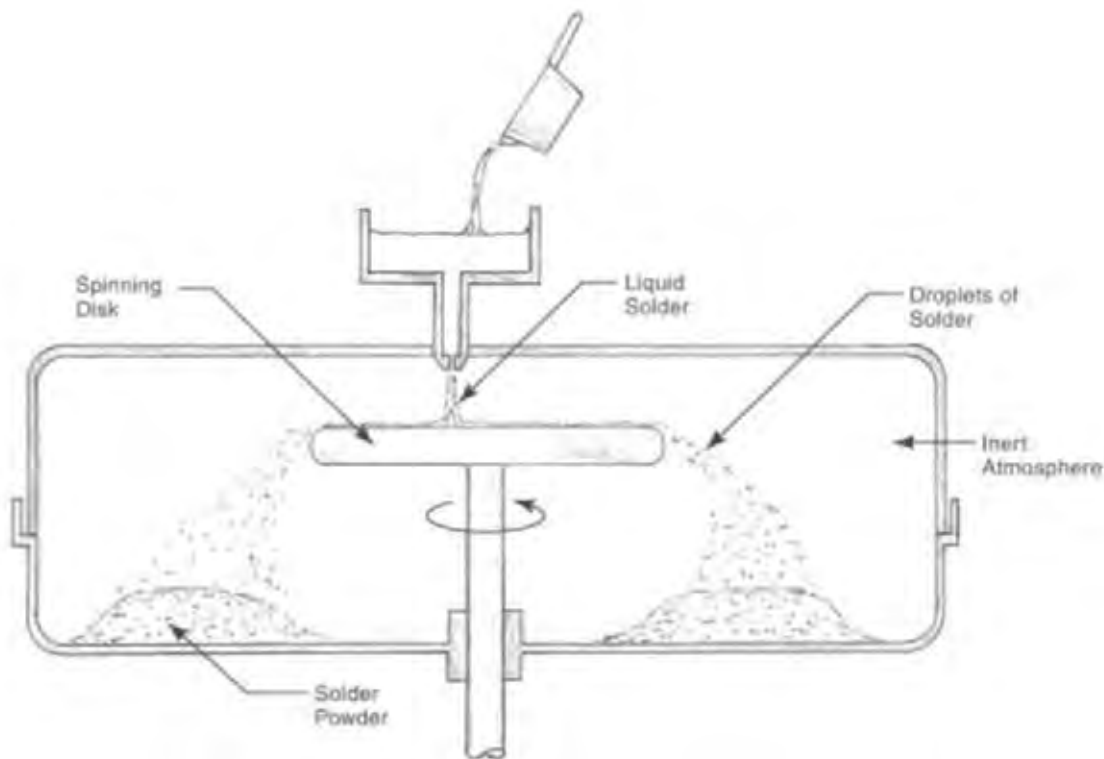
E2 Spinning disk atomization of solder to make powder for solder paste.
